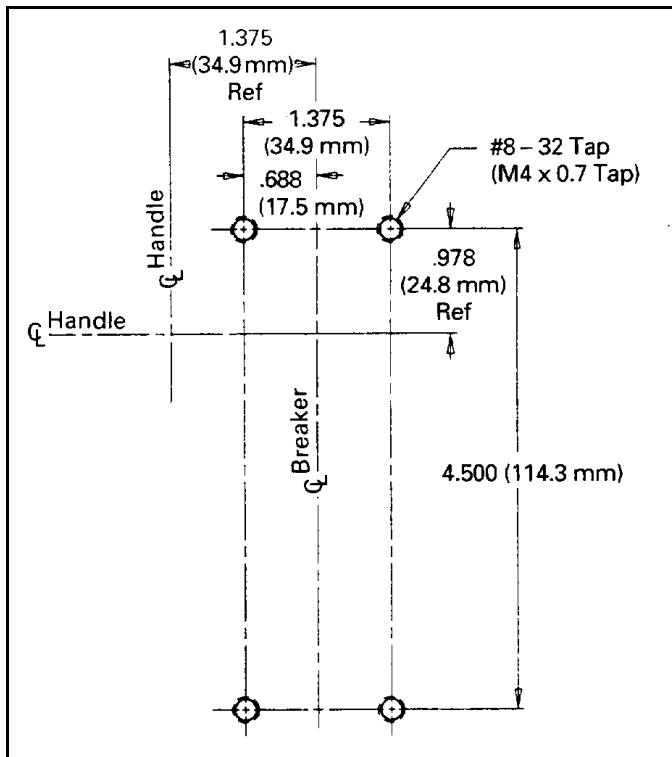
Drill & Tapping Plan for F-Frame Breaker
